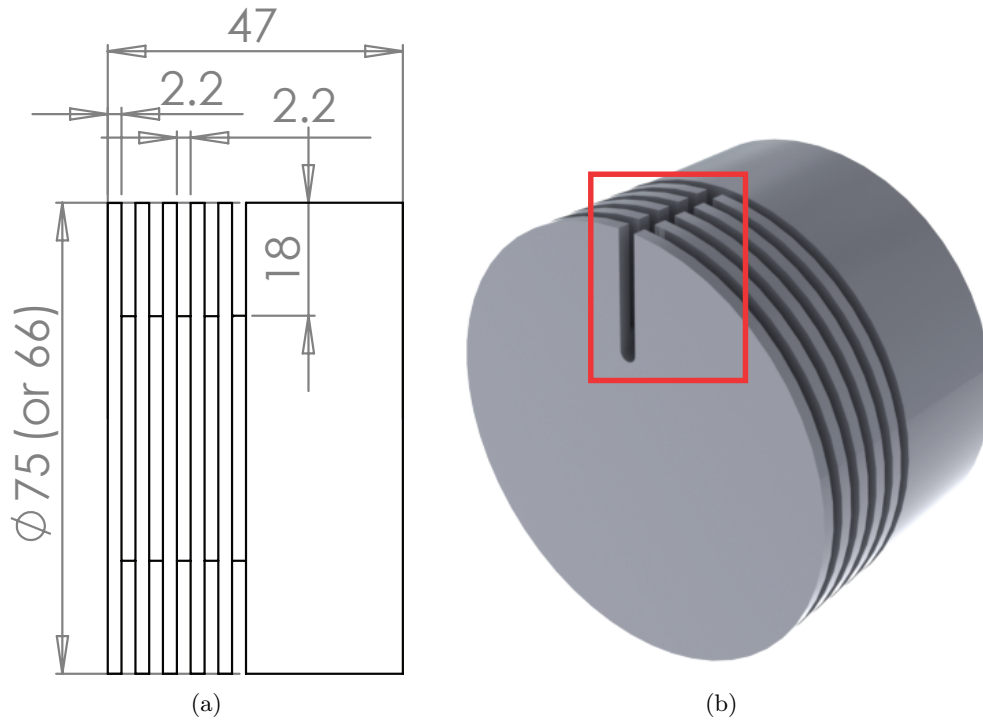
Workpiece design, showing a) Dimensions (mm) and b) Slot cut in discs
